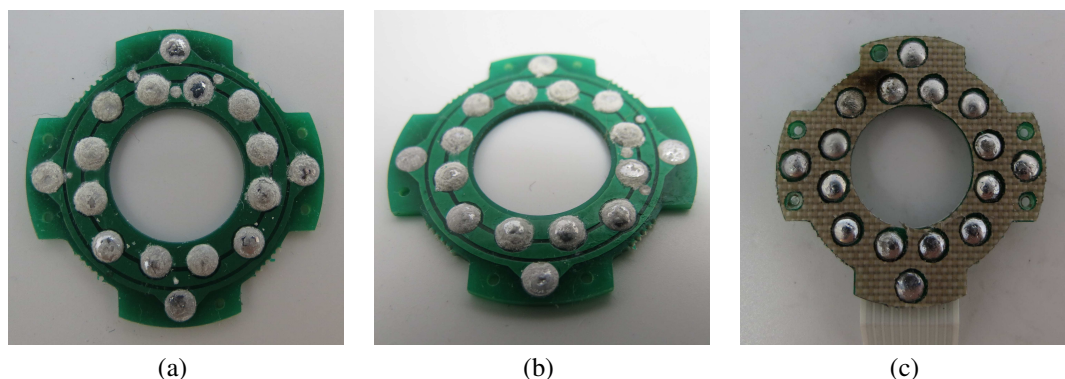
Corrosion on soldering connectors as a result of insufficient removal of flux residue. (a) and (b) Two examples of corrosion seen on soldering connector boards where the final flux cleaning step was omitted. (c) Connector PCB with spacer. During maintenance flux was re-applied in an attempt to clean the connector pad and subsequently not thoroughly cleaned, resulting in ignition of the flux-wetted spacer (top left).
